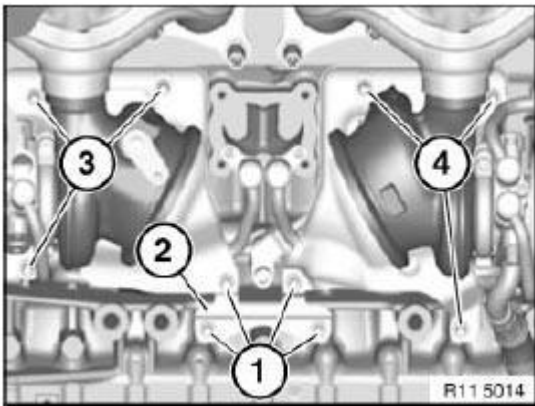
Identifying Bolts, Retaining Plate And Screws
